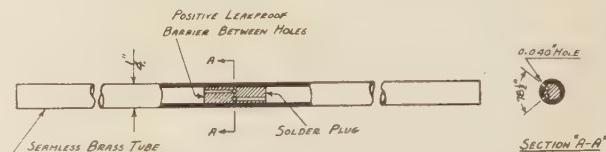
SPECIAL PITOT TUBE USED IN THE TESTS
